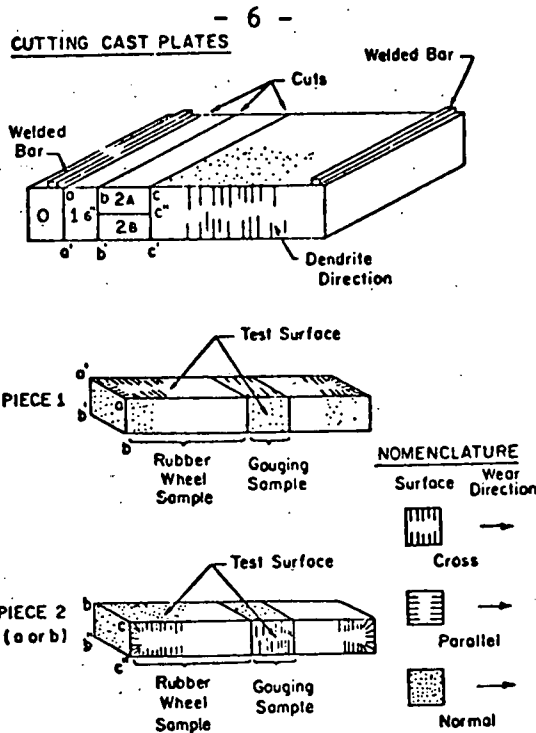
Sectioning scheme for obtaining rubber wheel and gouging wear test samples from cast plates.
